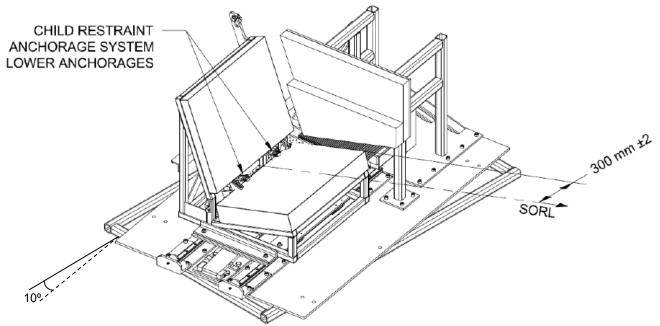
SIDE IMPACT SEAT ASSEMBLY
